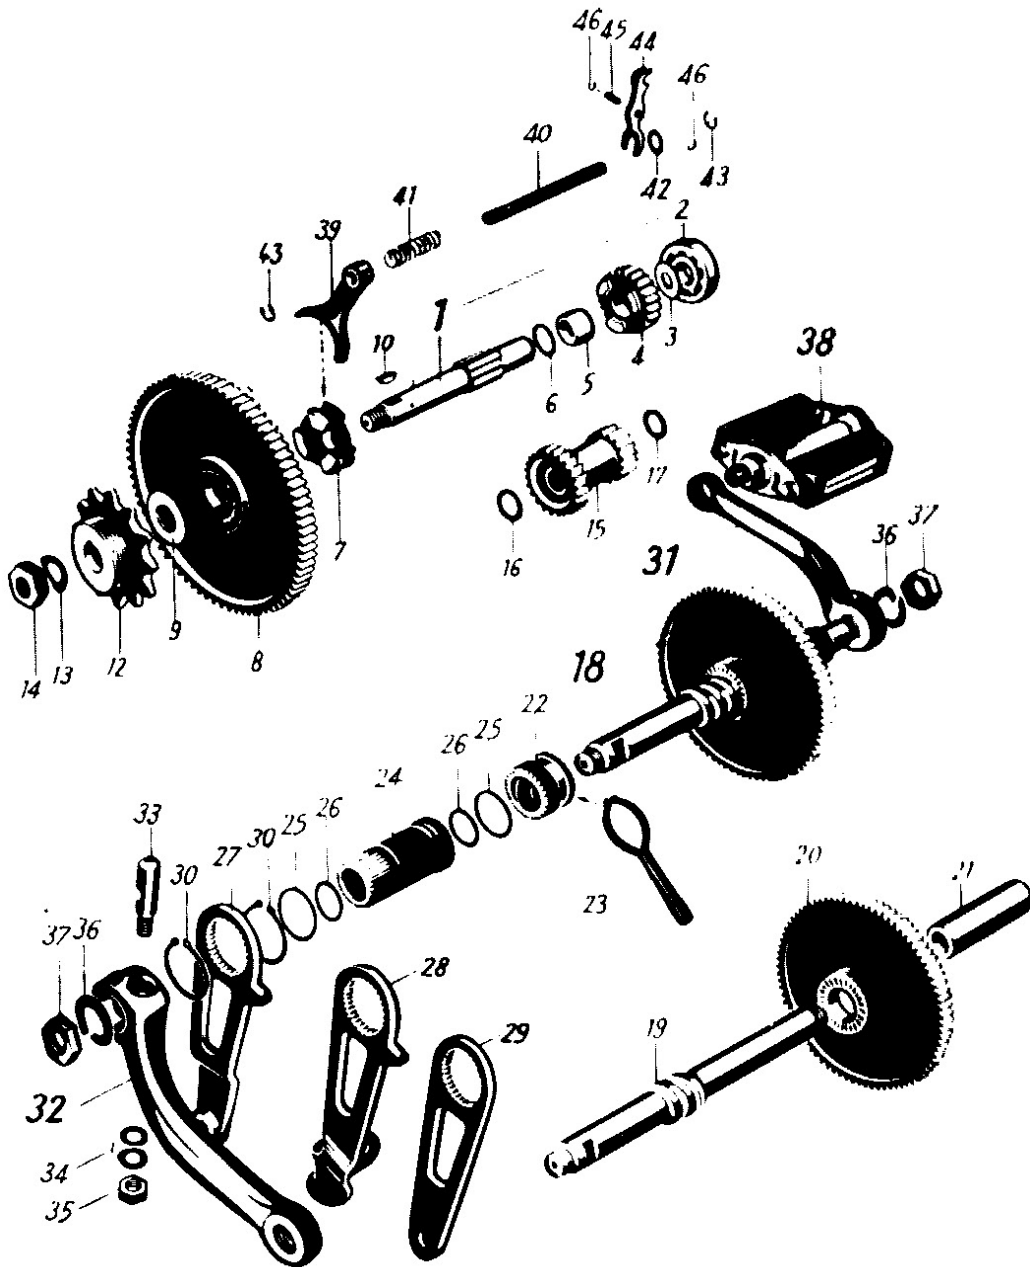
GEARBOX AND PEDAL COMPONENTS
